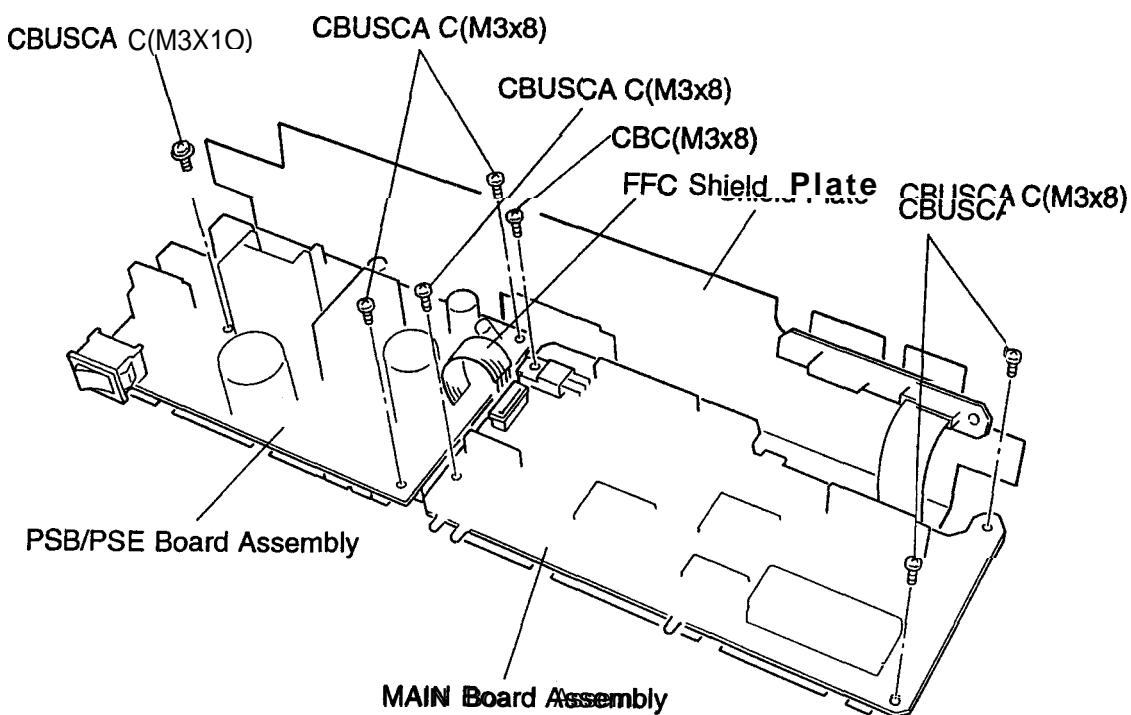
Removing MAIN and PSB/PSE Board Assemblies
